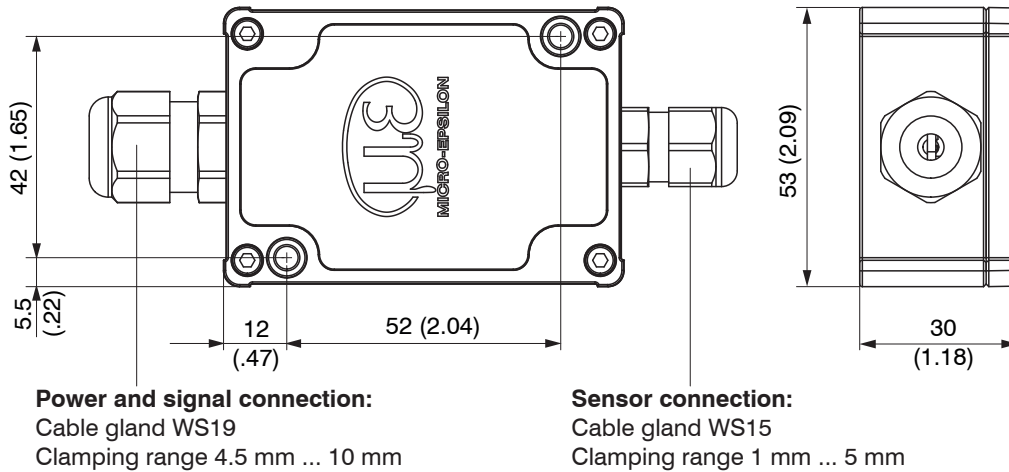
Dimensional drawing of MSC7401 controller, dimensions in mm (inches)
